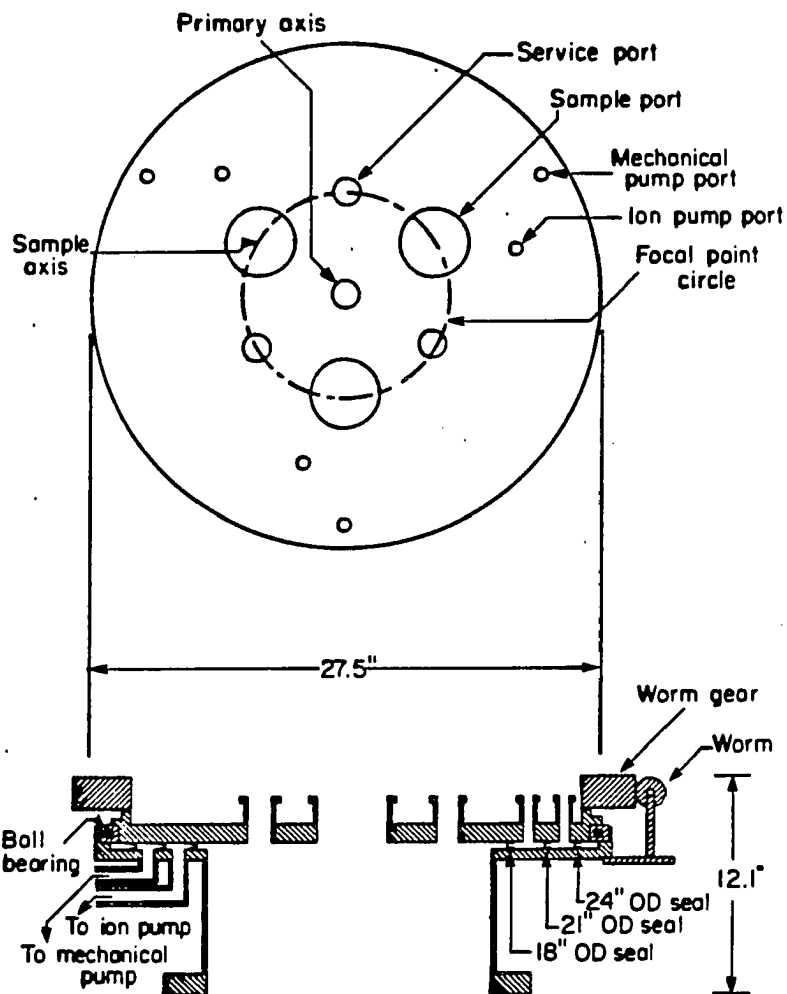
Schematic drawings of the rotatable platform: Top view is shown at the top; a linear cross section is shown at the bottom. Dimensions are given in centimeters. The diameter of the bottom steel plate is 69.9 cm. The sample axis and the primary axis are both perpendicular to the plane of the figure.
